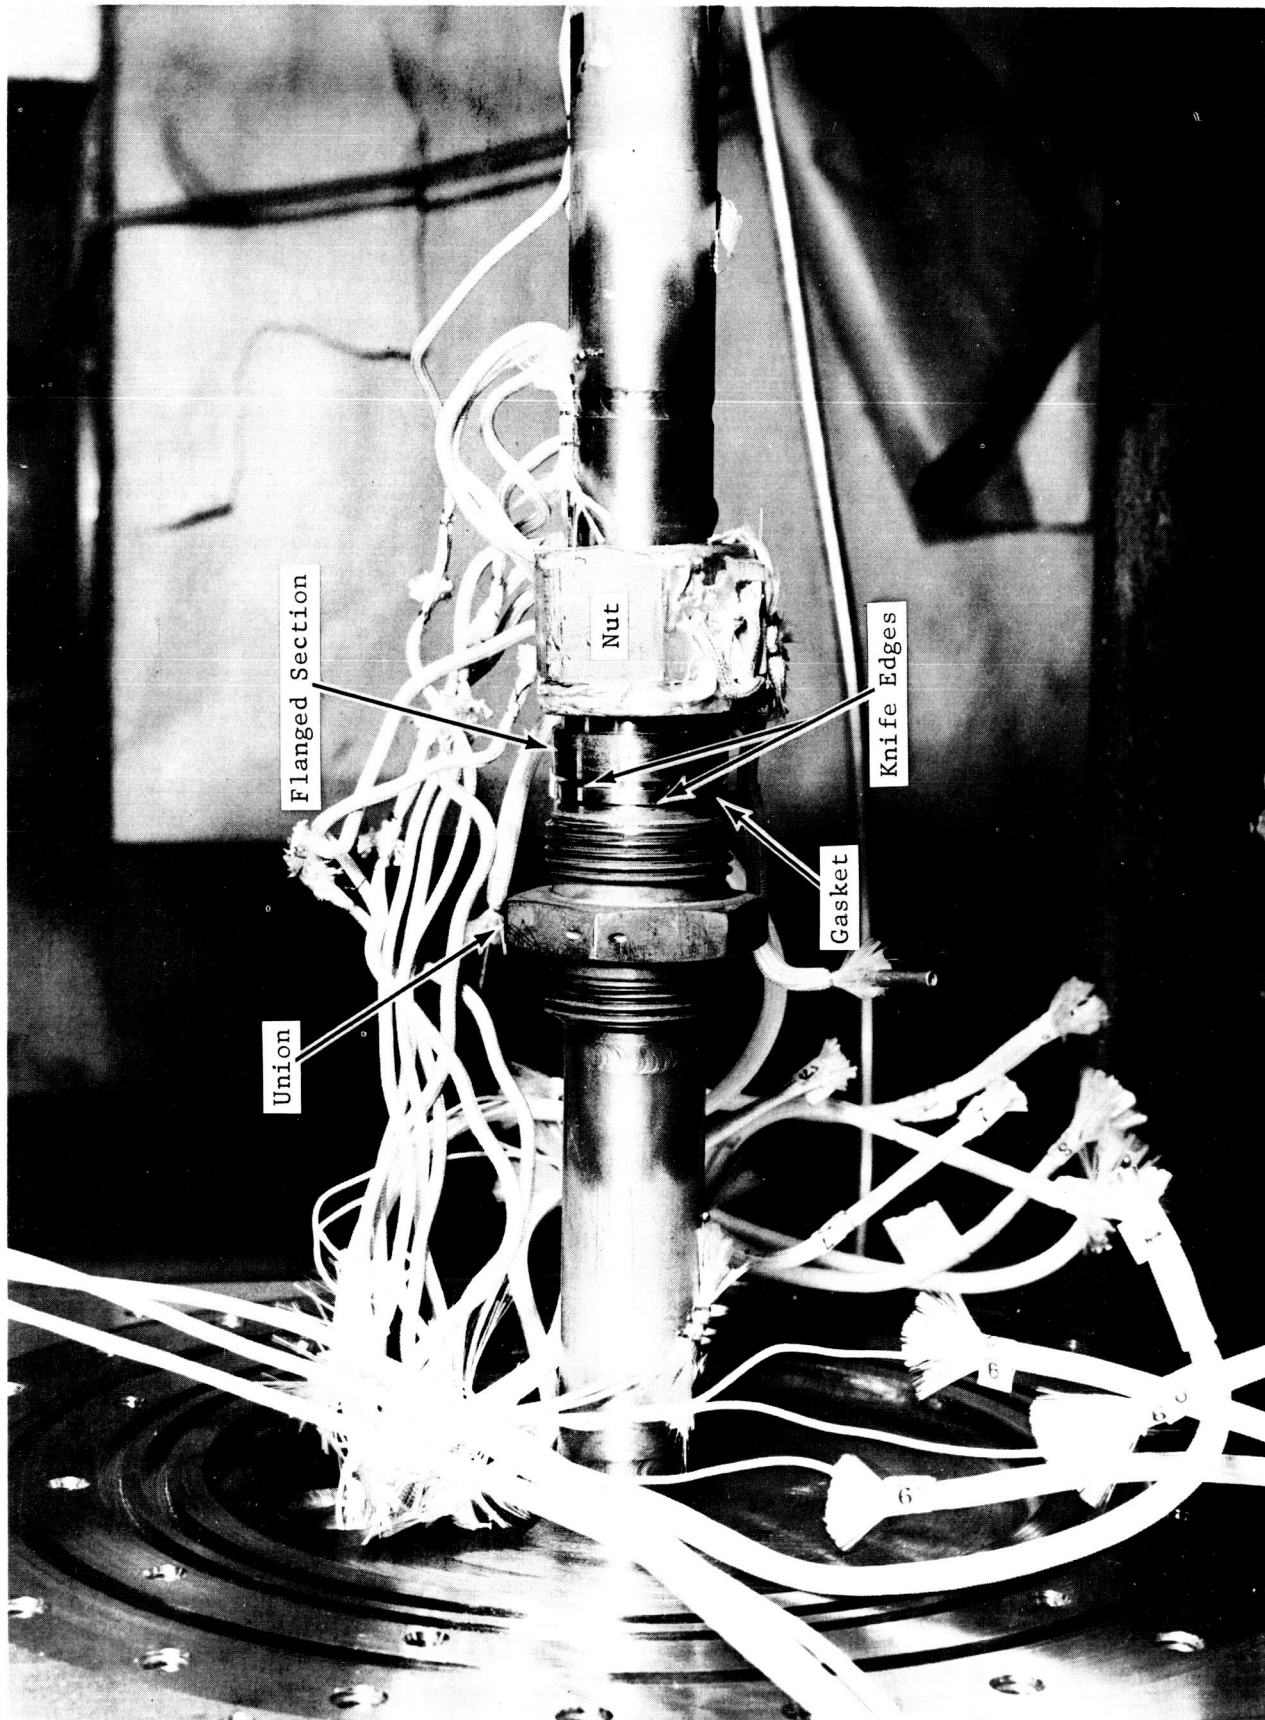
ASSEMBLY OF WELDED-KNIFE-EDGE CONNECTOR
